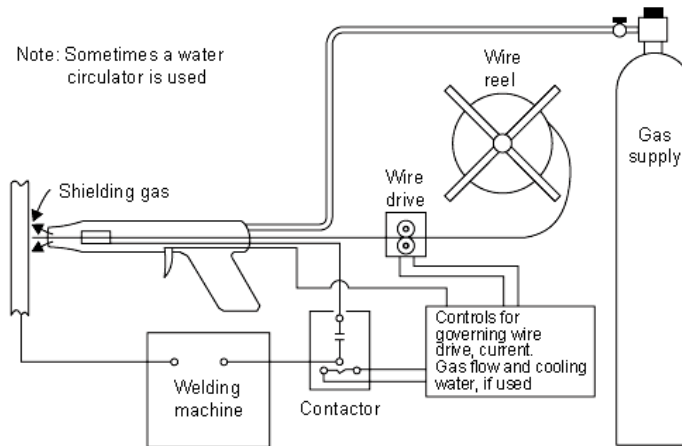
Schematic diagram of MIG/MAG (CO₂) welding
